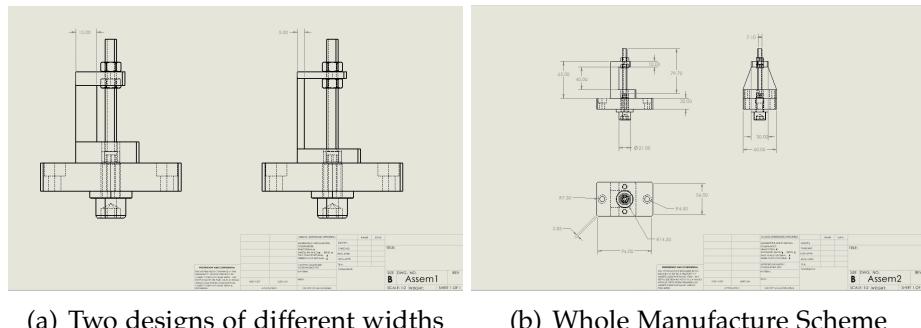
U-shaped part design details: (a) Dimensions for 2 types of the U-shaped part with varying different width but identical other dimensions. (b) SolidWorks drawing that shows all required dimensions for manufacturing; pre-made bolts for joint are neglected in the picture.
